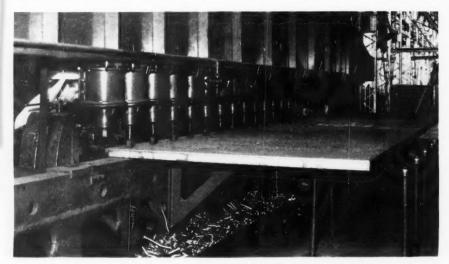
Large plate-planer shown here is used for beveling edges of flat sheet stock.
